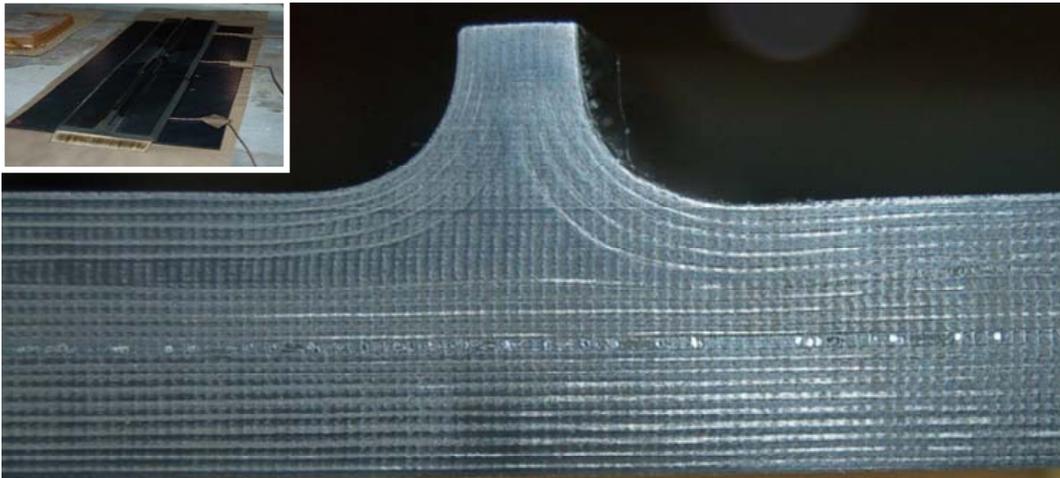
A close-up photograph of a typical joint in the welded panel
